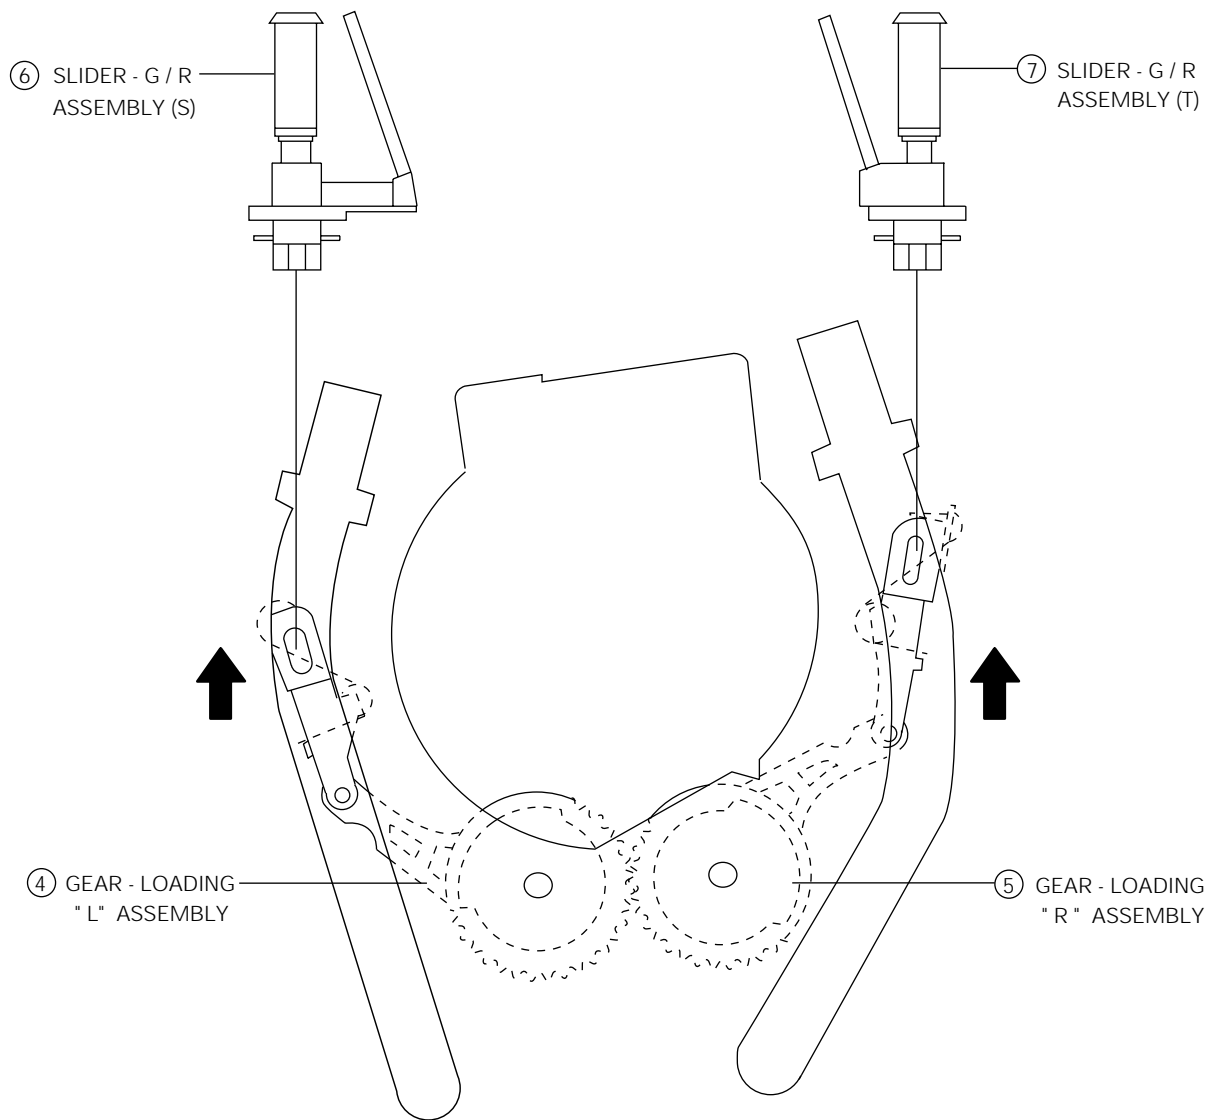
Assembly of Guide Roller Slides "S" and "T"
